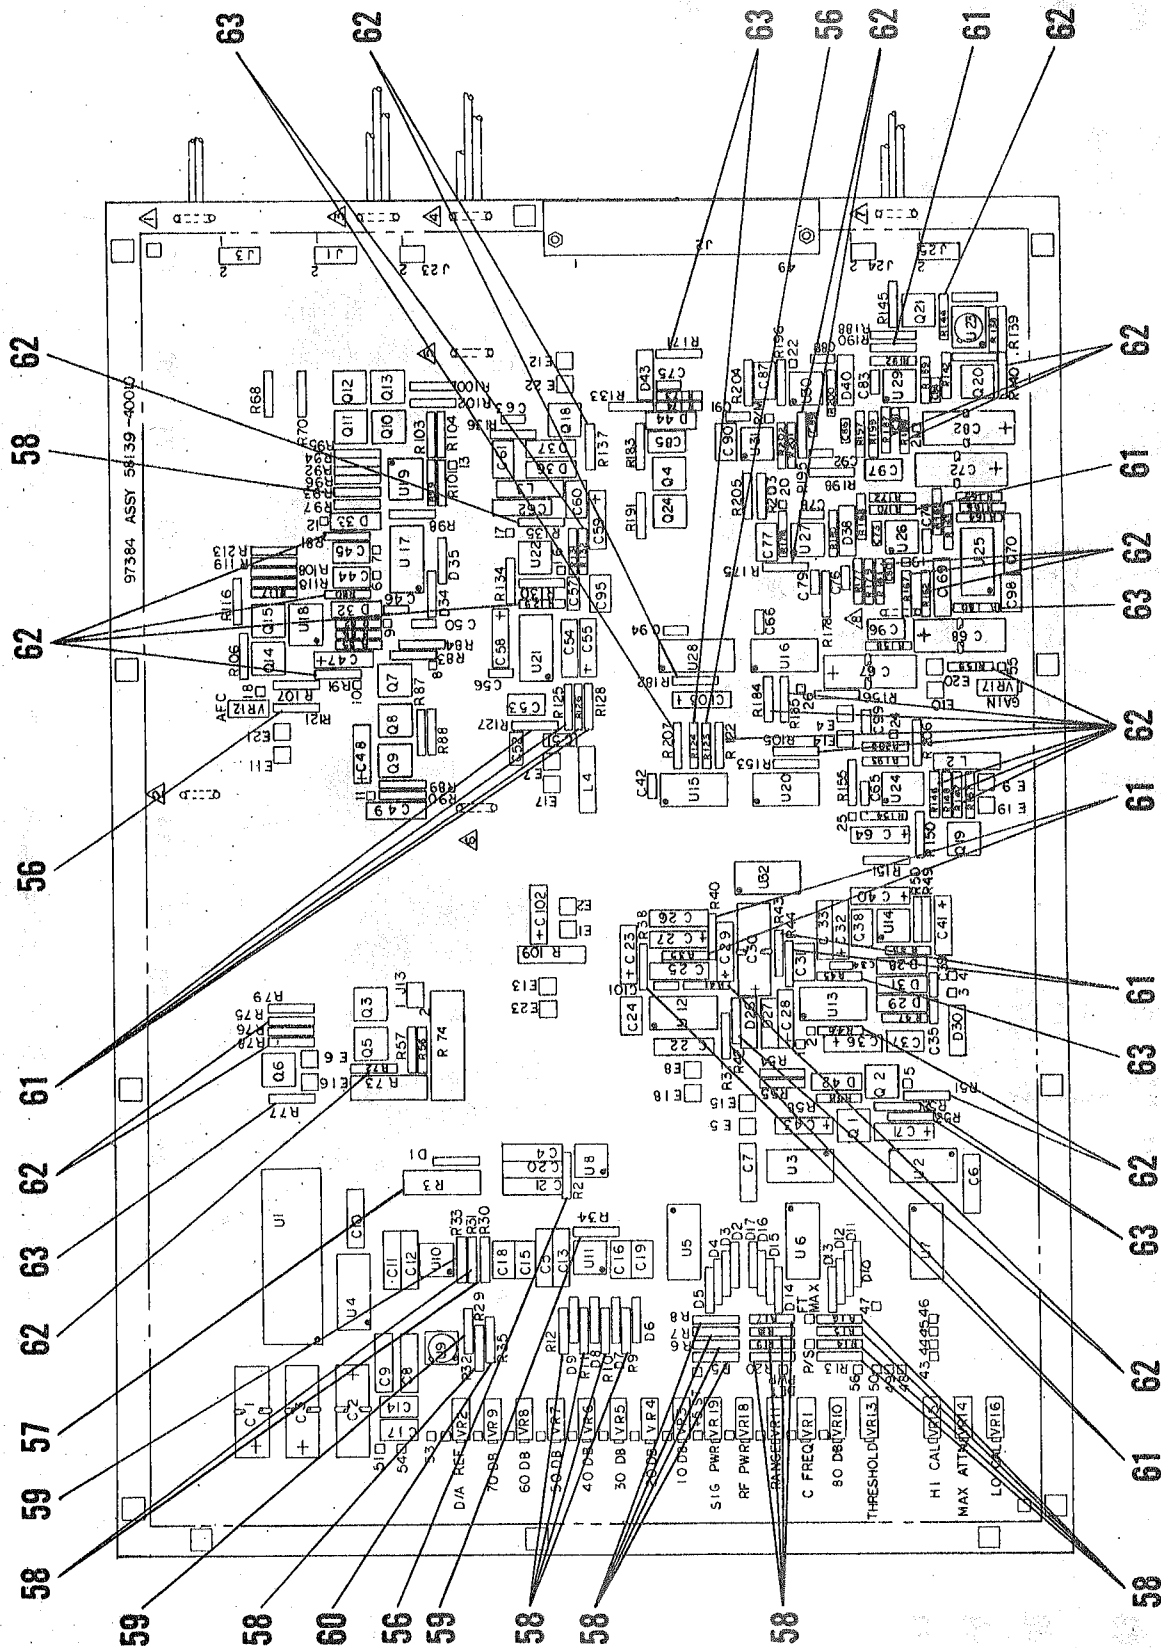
Circuit Card Assembly, Microwave Interface (Sheet 4 of 7)
